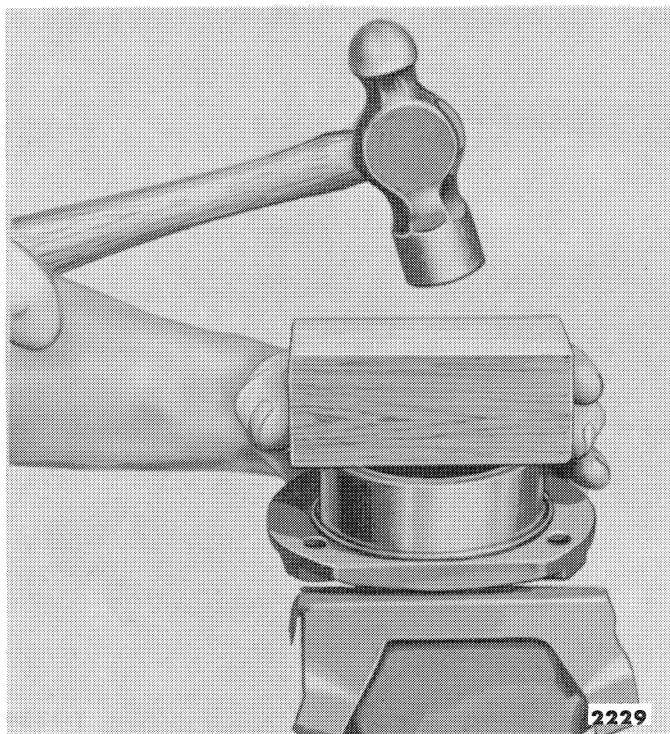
Installing Bearing Cup in Countershaft Front Bearing Retainer
